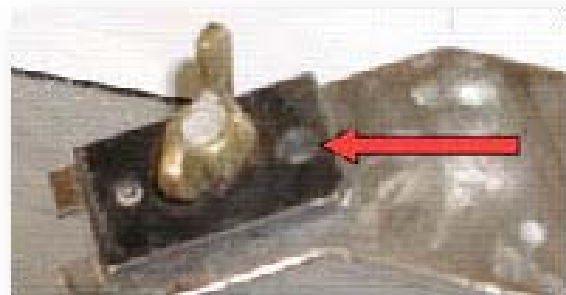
Wing nut and bracket showing hole for through-pin (red arrow)
